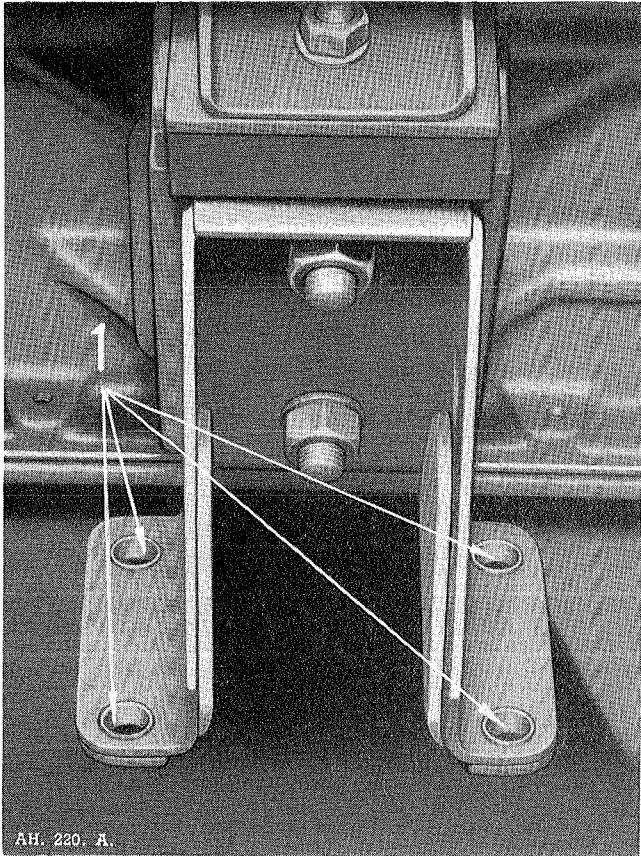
The engine left-hand front mounting bracket showing the four setpin holes at 1.
